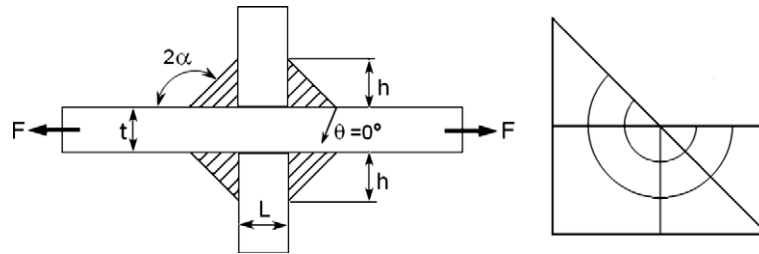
Geometrical parameters for transverse non-load carrying fillet welded joints and modulus used at the weld toe for the SED evaluation.
